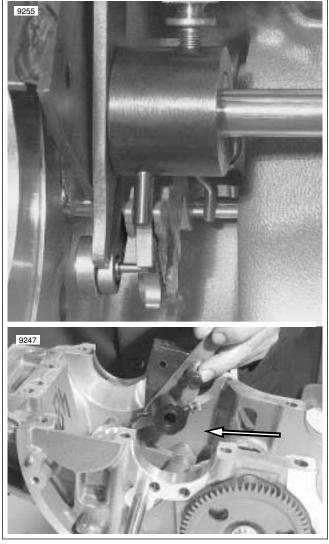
Shift Mechanism/Detent Retractor (HD-45339)
